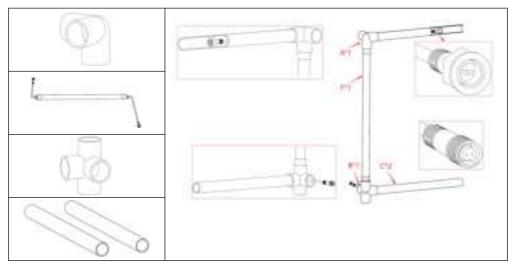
Assemble two 355MM long transverse tubes, a 4-pass, a 3-pass and a light tube as per the figure (Note: the lamp wire is in the 3-pass and 4-pass outlet holes).
